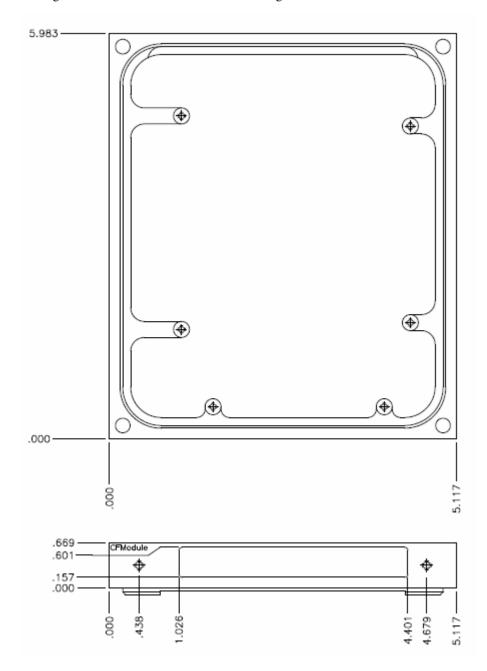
IDAN-CMT56118HRS Dimensional Drawing
